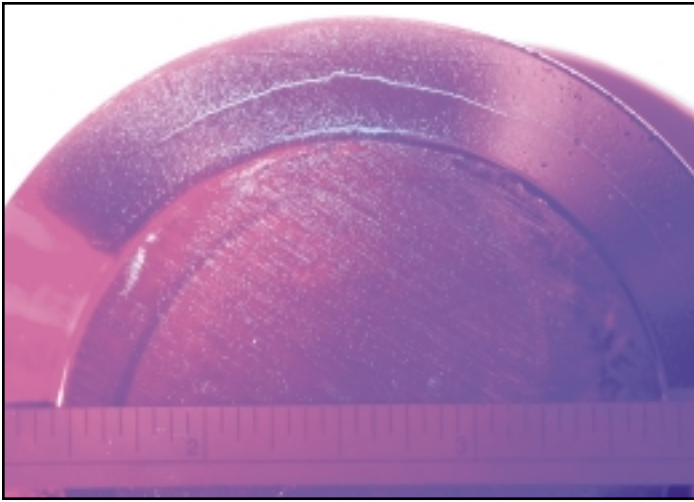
Magnetic Particle Inspection, using fluorescent particles illuminated by ultraviolet light, revealed the crack in detail. Subsequent sectioning and examination by Scanning Electron Microscopy determined it was a quench crack resulting from defective heat treatment.
